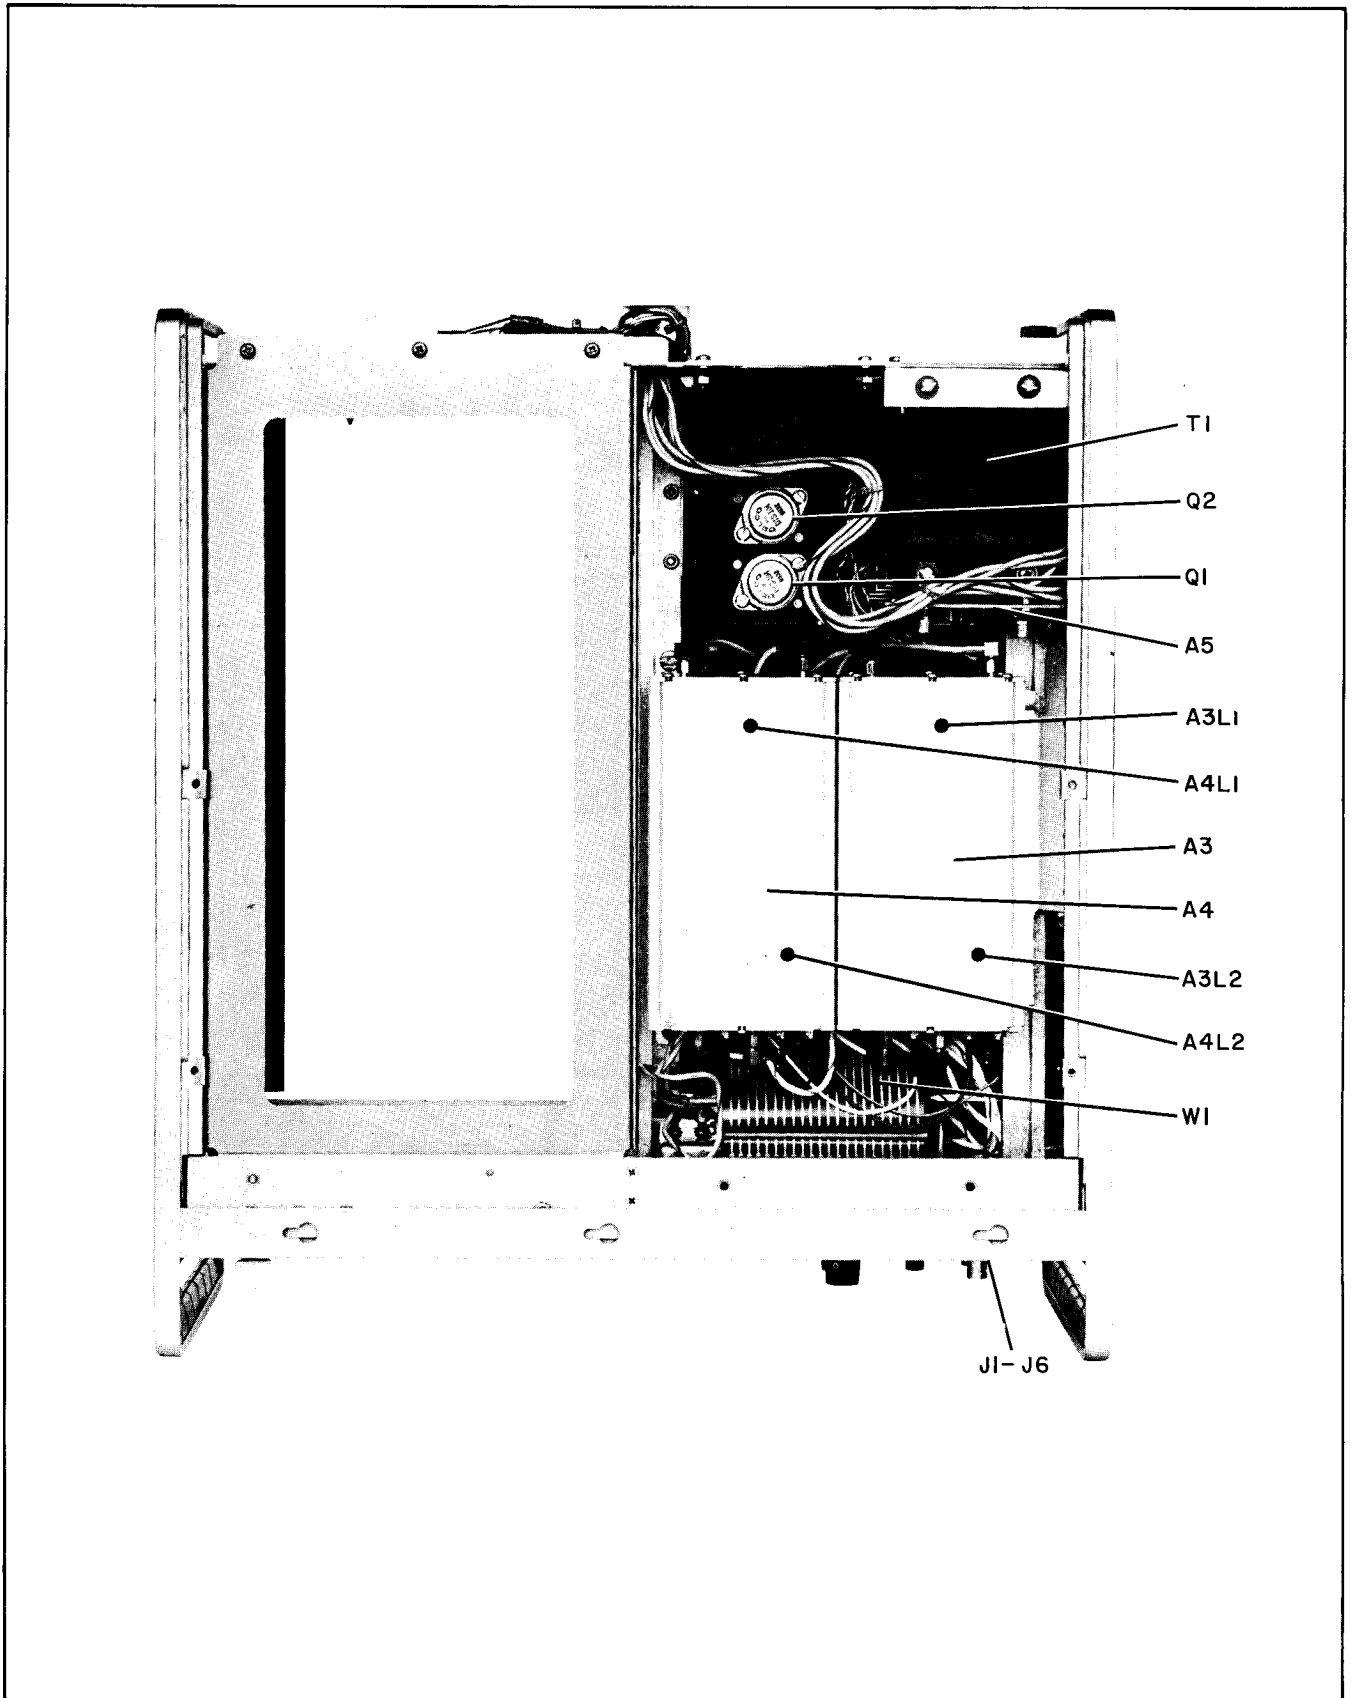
Location of Major Assemblies and Adjustment Points (2 of 2)
